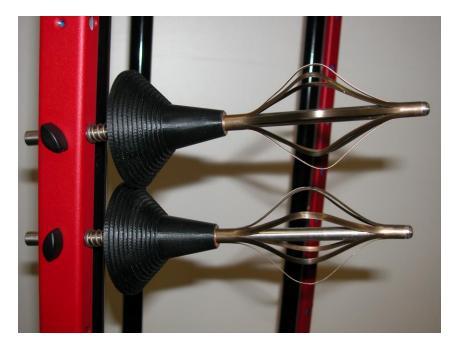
Bobbin holder Bobbin holder for the use of 48 holder positions
